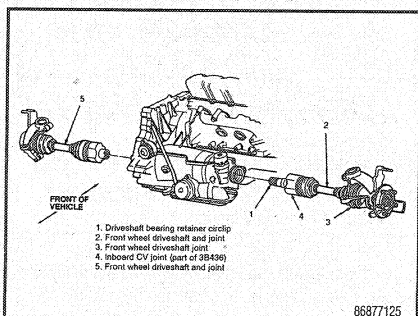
Exploded view of the halfshaft assemblies and related components—automatic transaxle
